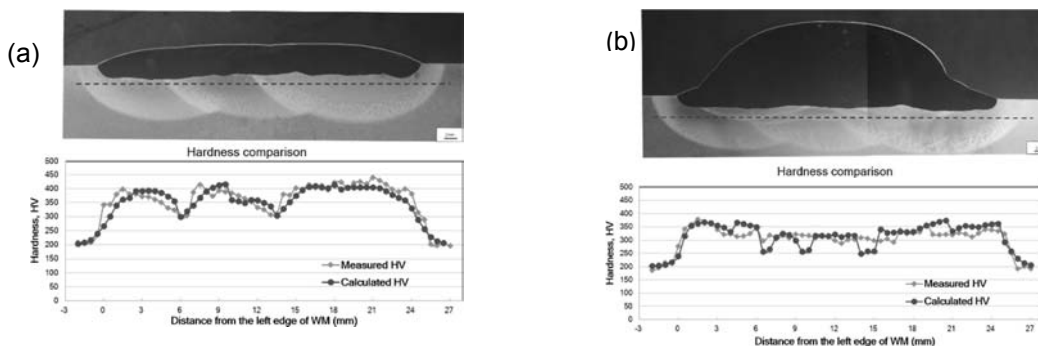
Hardness comparison after 1-Layer and 6-Layer welding of A508 steel: (a) 1layer-3pass welding and (b) 6layer-21pass welding
